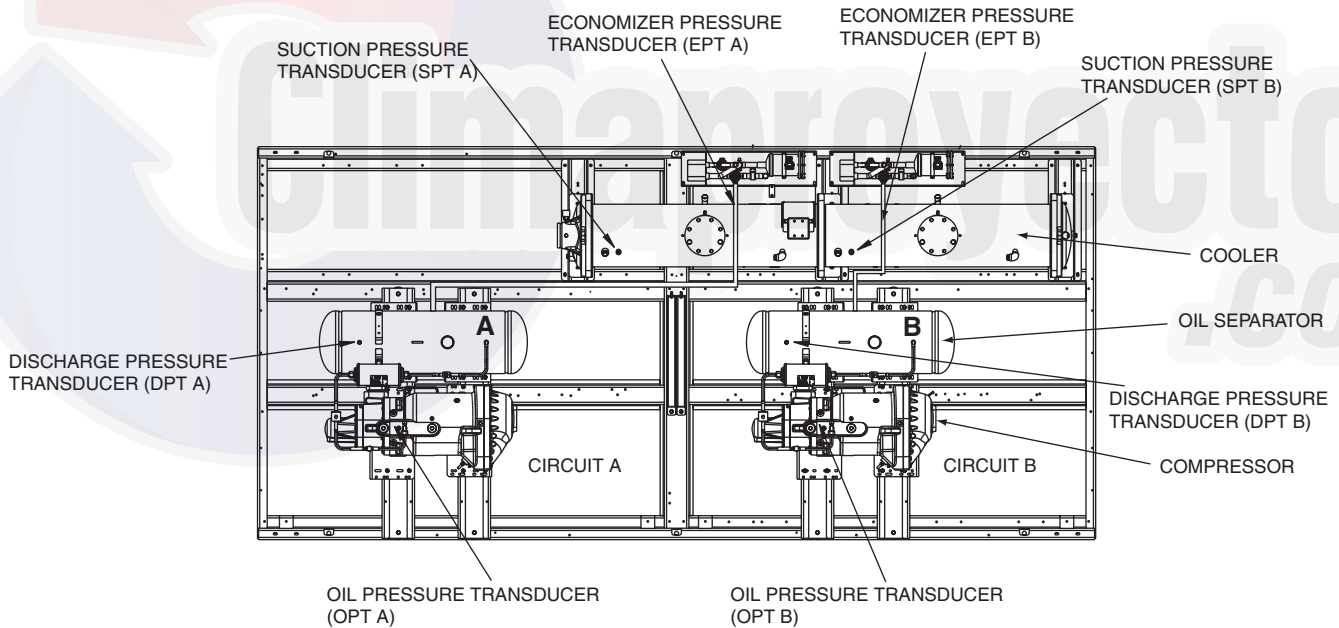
A — Transducer Locations (Flooded Cooler Units)
